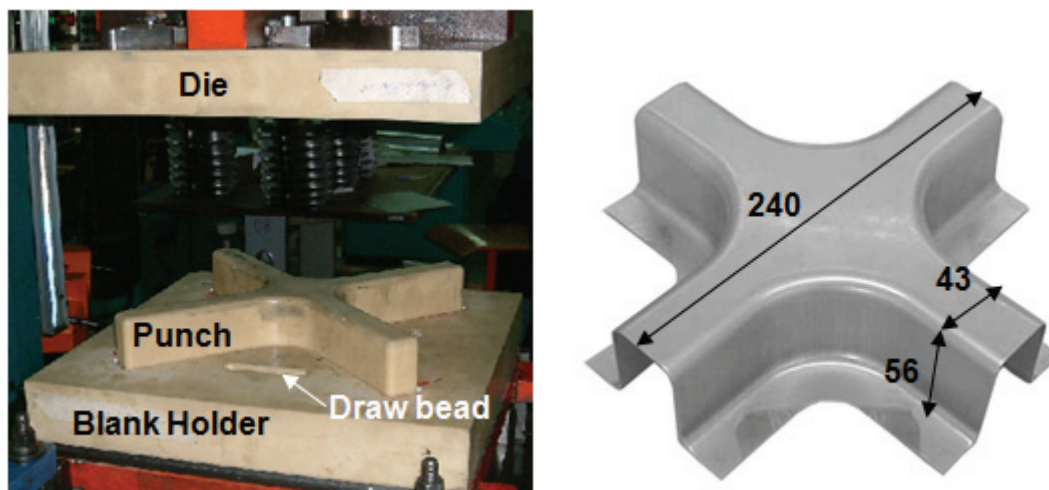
Cross shape geometry tool and part dimensions (in mm).
